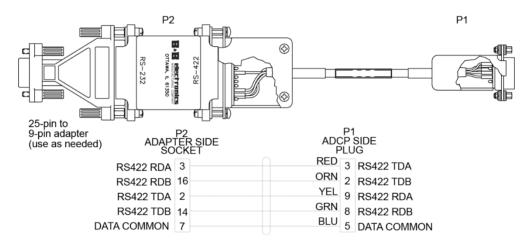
RS232-to-RS422 Converter Wiring (25-Pin to 9-Pin)
